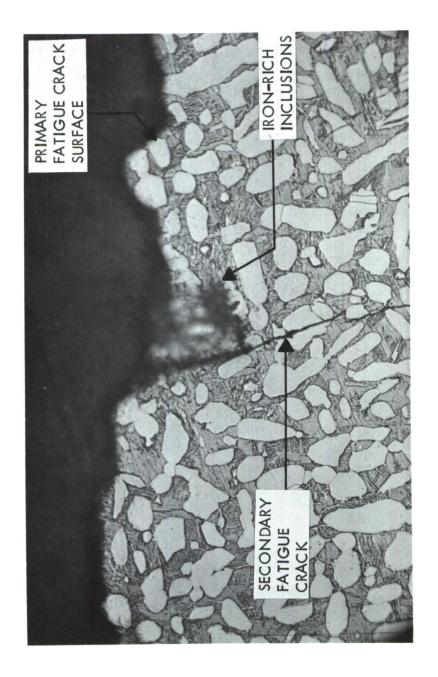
Ti-6A1-4V Fatigue Crack Origin (450X)
